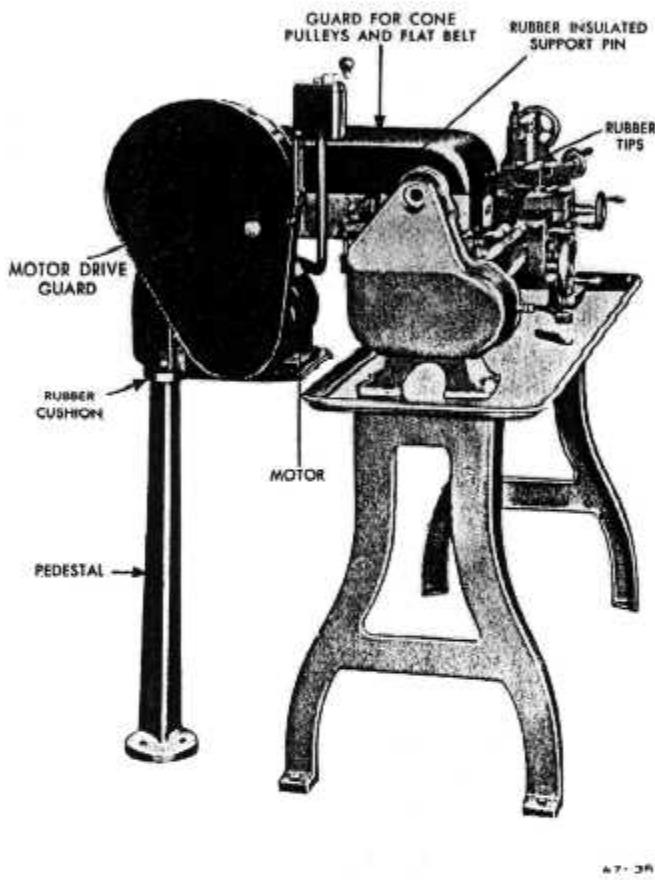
END VIEW OF COUNTERSHAFT ASSEMBLY
